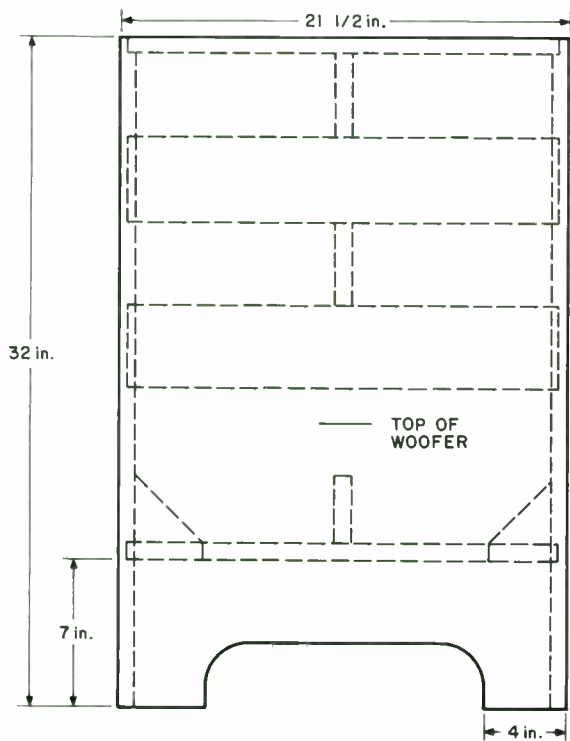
Side view of enclosure assembly. Dimensions are given for a $\frac{3}{8}$ -inch rabbet/dado.
